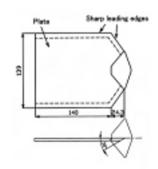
Arrangement of capsule and plate. (Unit: mm)
